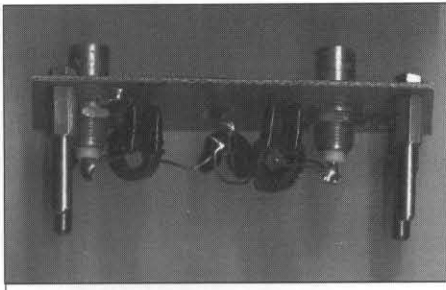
40 low pass filter using a scrap of PCB material and single hole mount BNC connectors.
